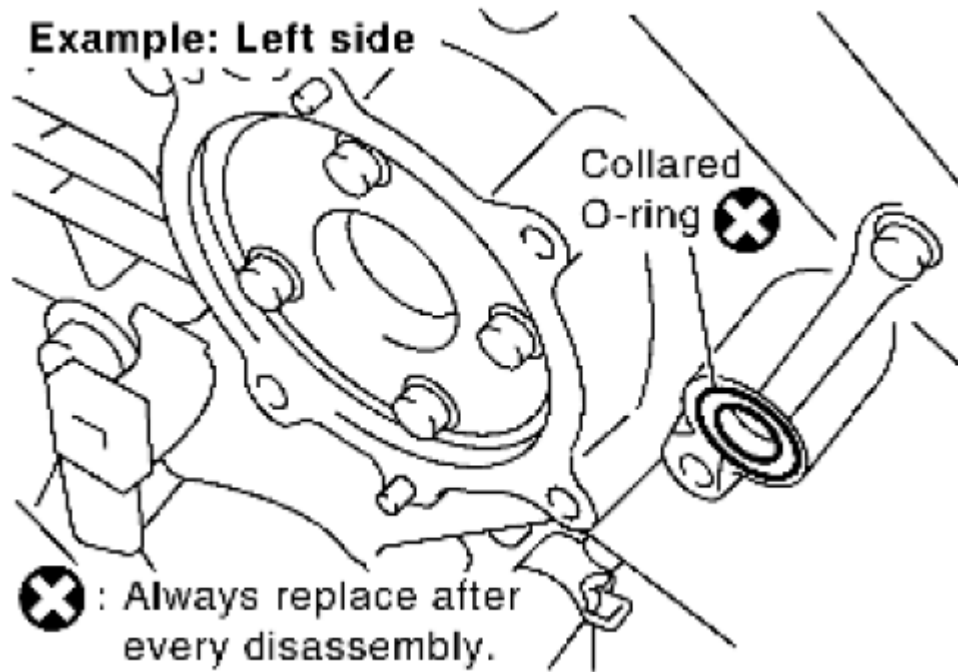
Identifying Collared O-Rings From Front Timing Chain Case (Left And Right Side)
